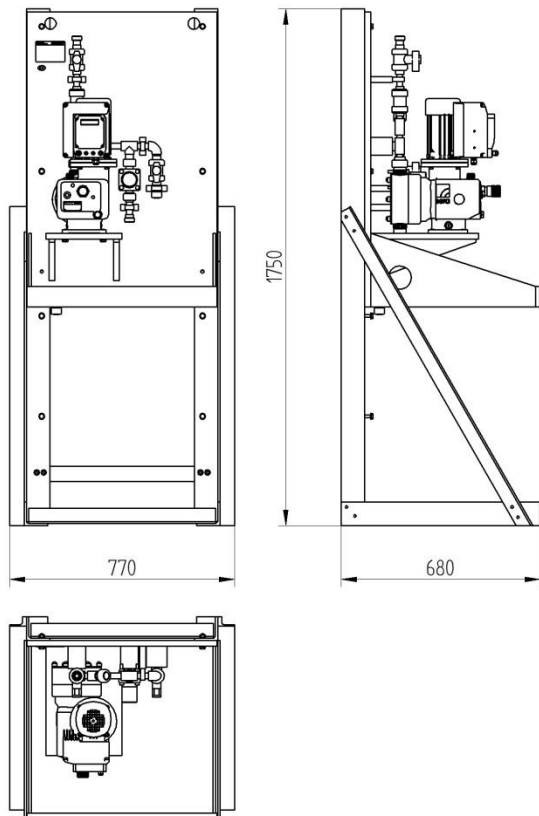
Dimensions of the CVD1s (floor mounting, GFK stand)
